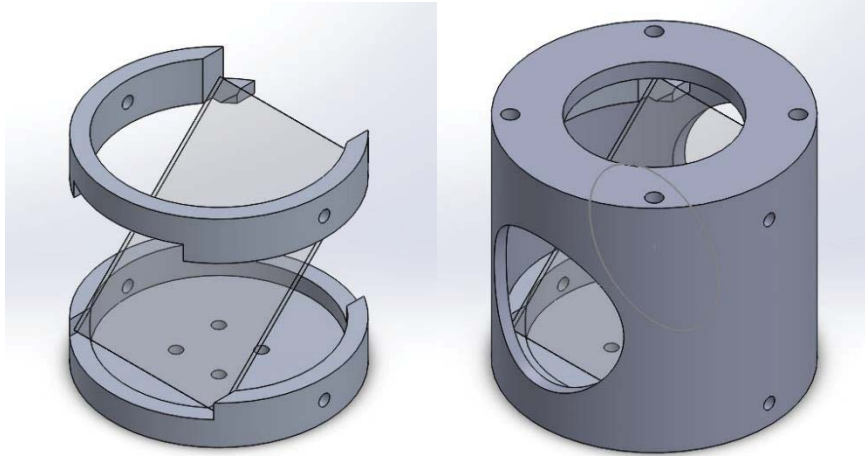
(Left) OCT probe base mirror mount without the cylindrical outer housing. The square hole pattern on the base is a series of through holes from which the probe is fixed to the rotation stage. (Right) The outer cylindrical enclosure shown on the mirror mount. The holes on the round face of the cylinder are used to fix the mirror mount halves to the outer housing. The four holes on the top flat face are for mounting the rods which hold the galvanometer block/telecentric scanning lens subassembly.
